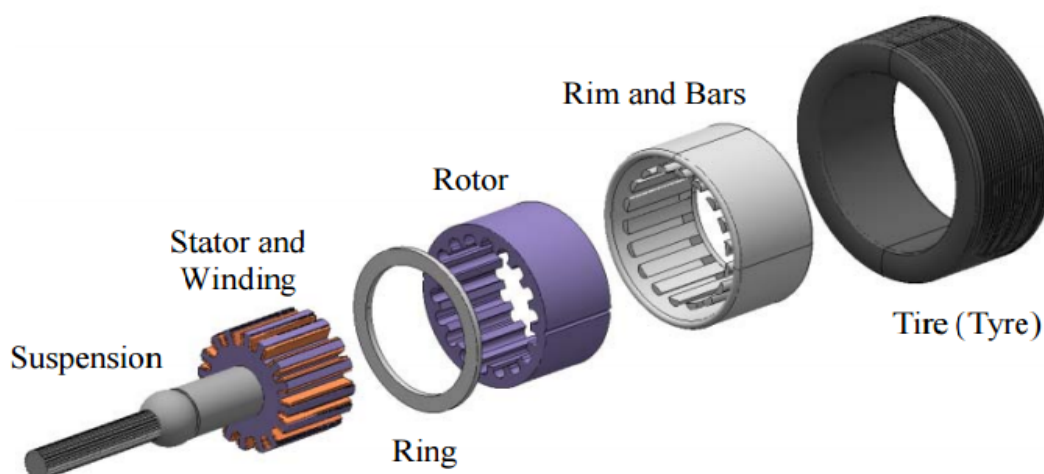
External rotor SRM arrangement for in wheel drive application [44].
